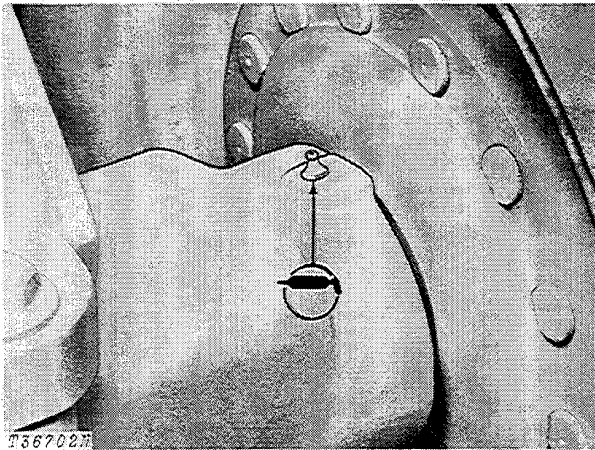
Axle Bearing Grease Fitting (Front Shown) (4 Points)
